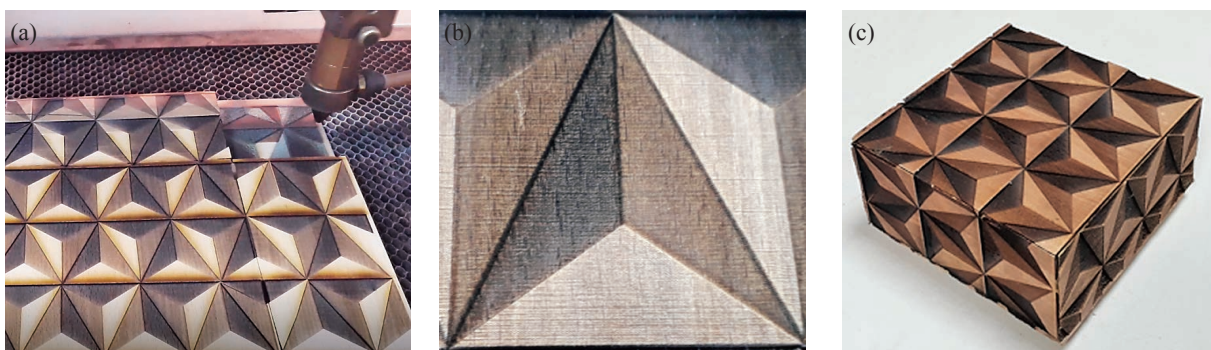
(a) CNC laser engraved surface, (b) Local view of the engraving motif, (c) Assembled wooden box
